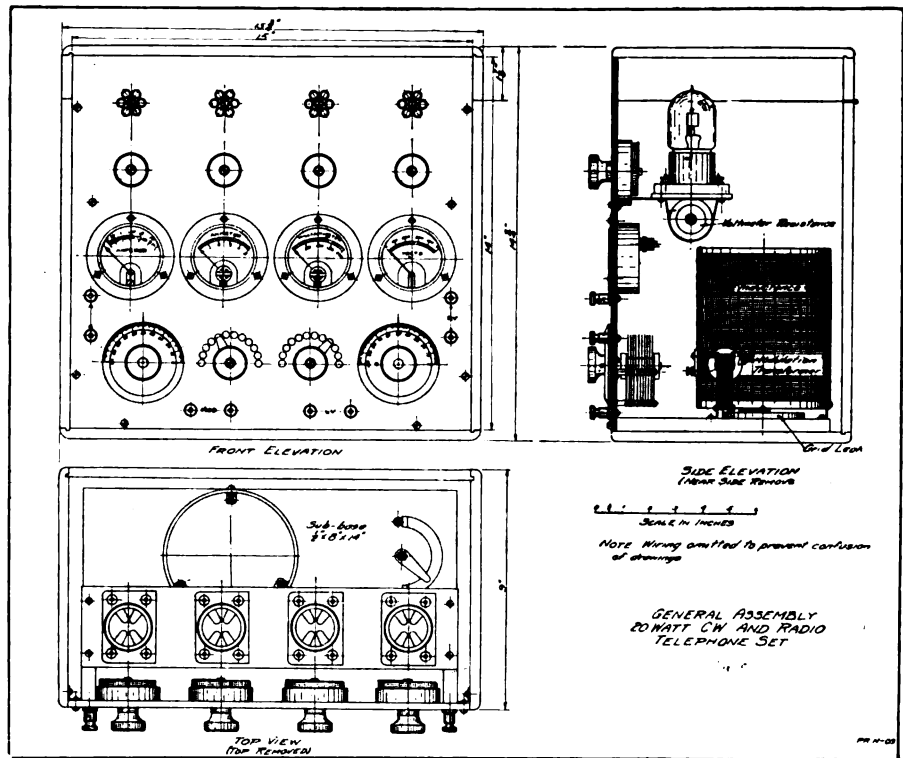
is a rear view of the panel removed from the cabinet. The builder should note especially the rigid type of bus wiring used, all connections being as straight and direct as possible. Fig. 2 is a general assembly drawing which will help to make clear certain points which cannot be readily seen from the photographs.
